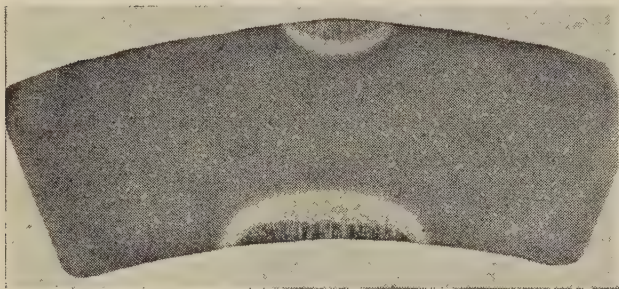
CROSS SECTION THROUGH SINGLE-BEAD WELD TEST SPECIMEN; PICRAL-NITAL ETCH, $\times 1$
